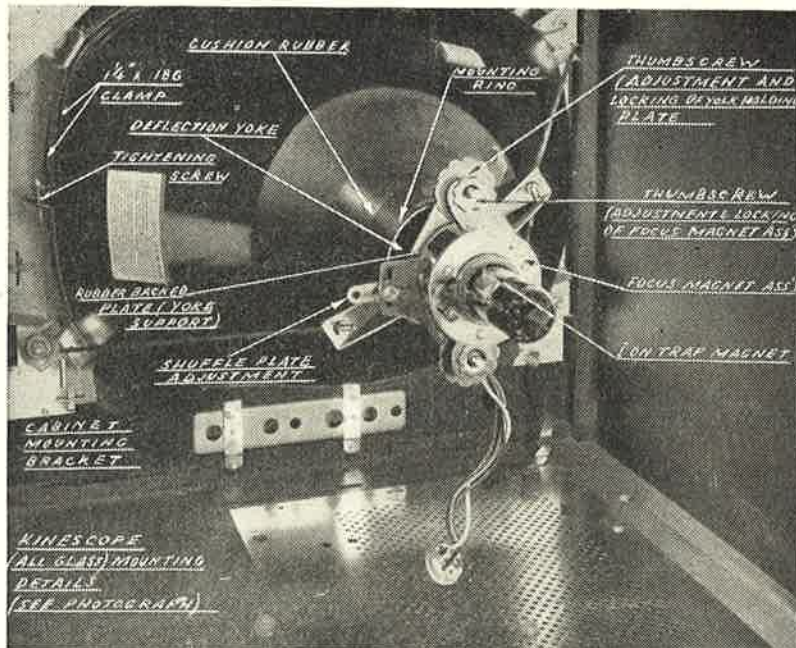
Photograph illustrating the mounting of a magnetically focused tube (RT100).
